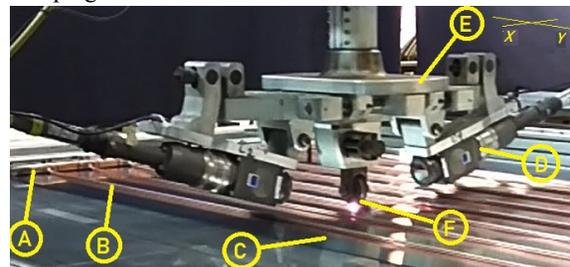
Laser station (A – header tube, B – riser tube, C – thin sheet panel, D – laser head, E – gantry carriage, F – laser carriage wheel).
